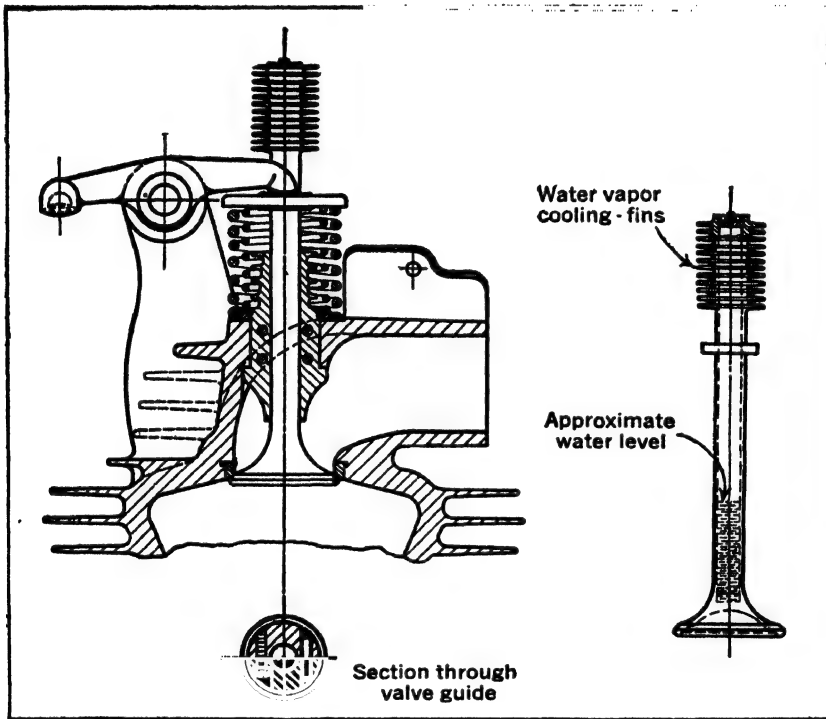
Application of a Water-Cooled Exhaust Valve to an Experimental Air-Cooled Engine Cylinder. This Method of Cooling Requires Very Elaborate Design.
